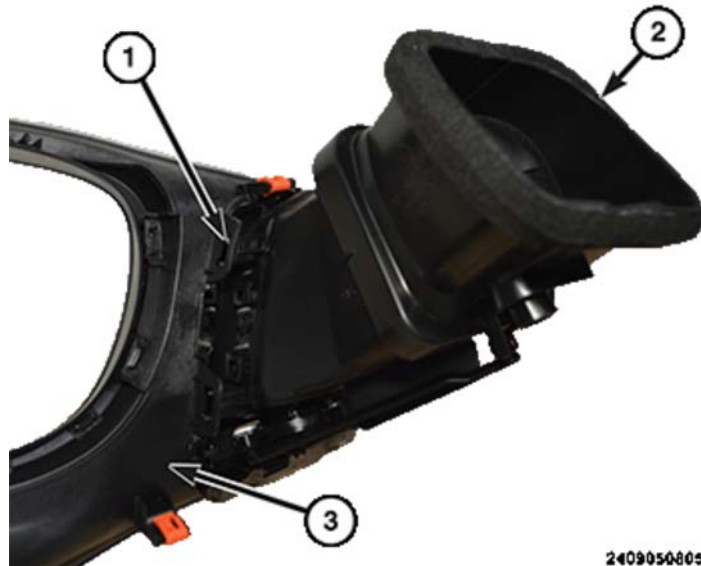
Air Outlet, Retaining Tabs & Instrument Panel Bezel
